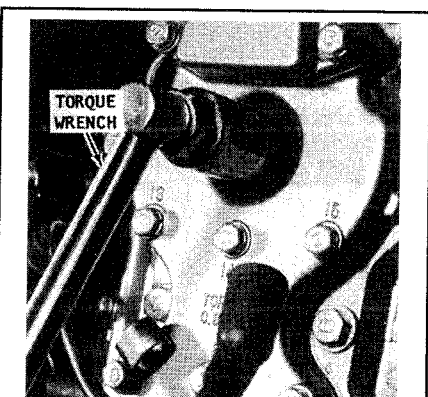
then use a torque wrench to tighten the plug to spec
